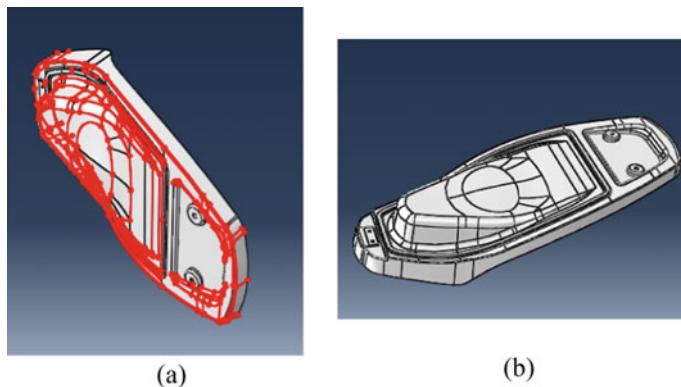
Geometry Import and Clean-up, a Imprecise Geometry highlighted using the Geometric Diagnostics tools; b Rectification of imprecise geometry using the Geometry Edit tools
